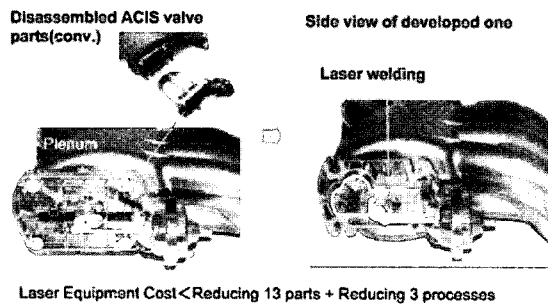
Laser welded plastic air intake manifold used for car (Courtesy of Toyota Motors)
